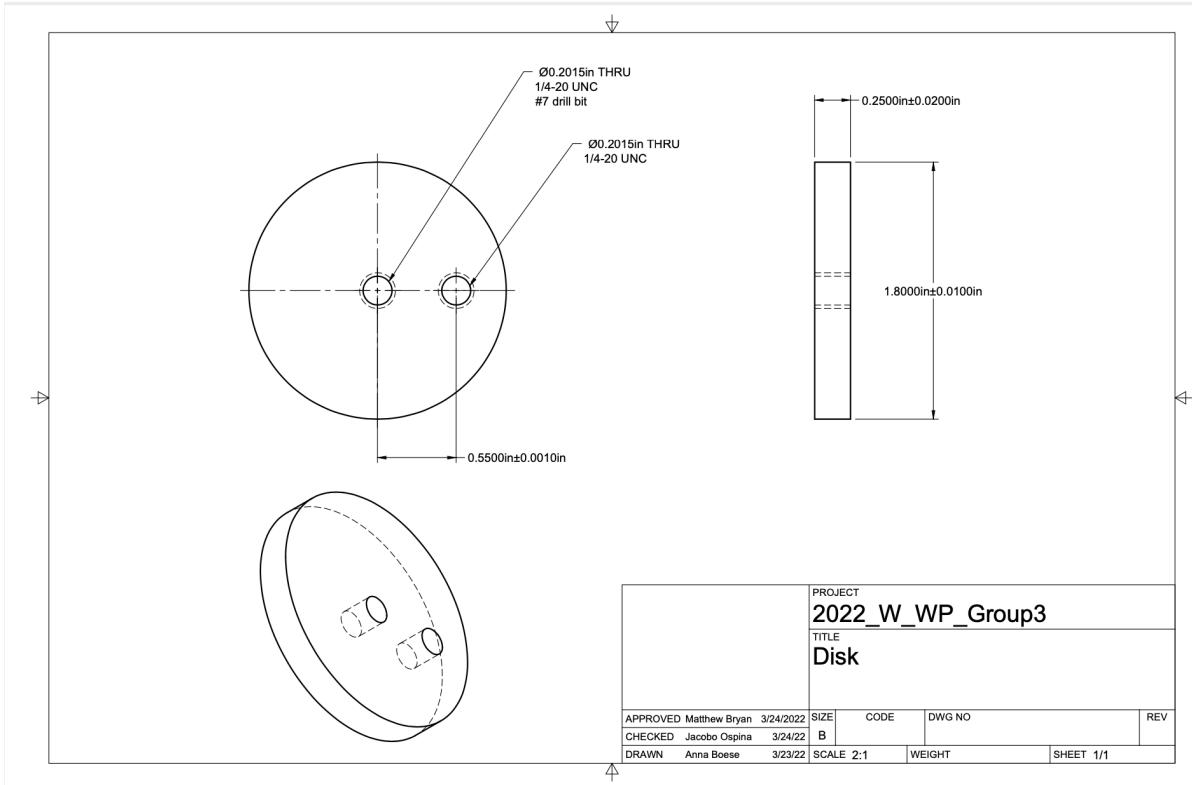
C: Part drawing of the rotating disk in the scotch-yoke.
